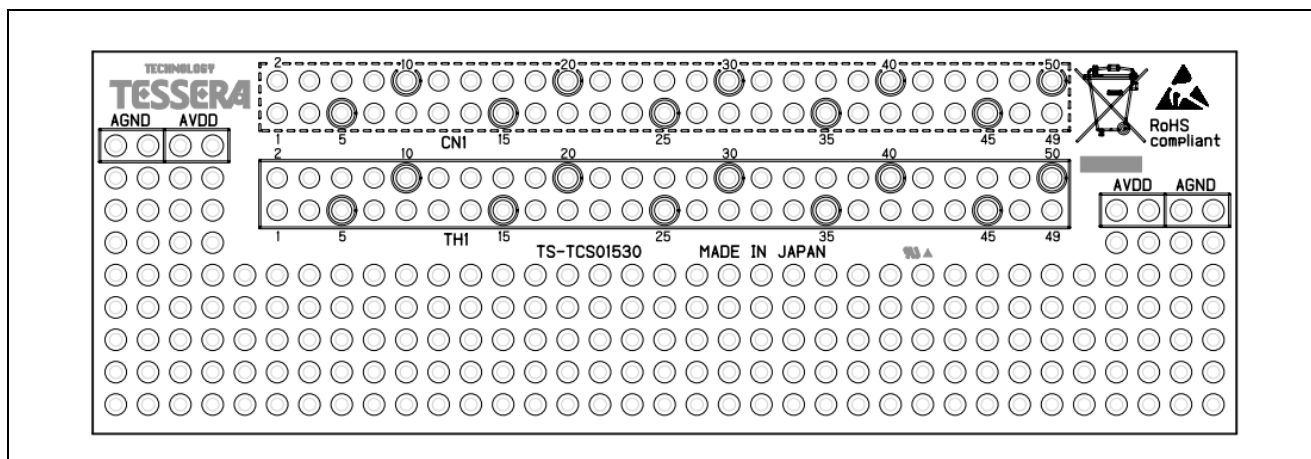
TSA-EXT BOARD Component Layout (Front)
